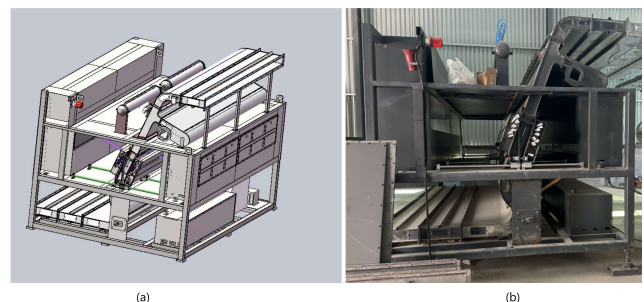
The contaminants cleaning machine: a) the CAD diagram and b) the prototype of the machine.
